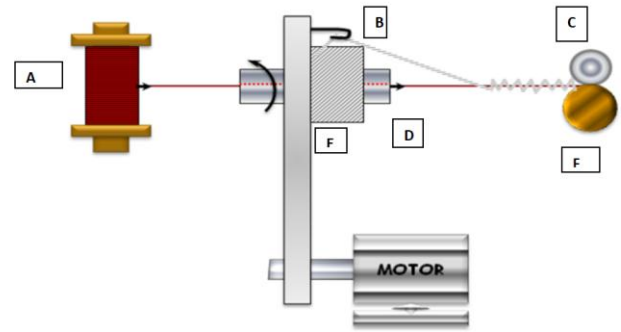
Wrap Spinning Machine MACHINE PARTS: A-SPOOL (Red Silk) B-Wrapping Finger C-Delivery Package D-Hollow Spindle E-REEL (Silver) F-Winding Drum
